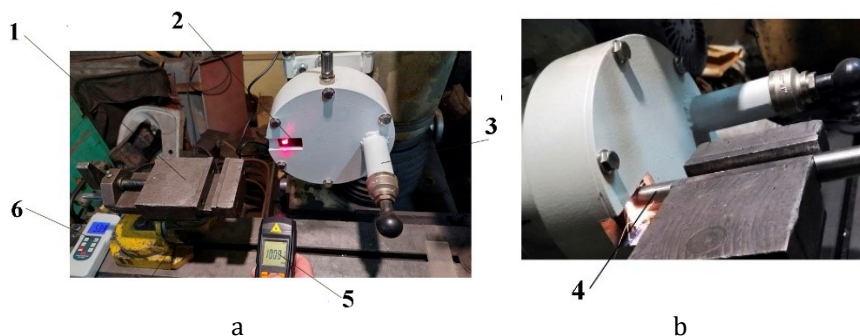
Experimental procedure: (a) experimental setup; (b) grinding process; 1 – vise for clamping the workpiece; 2 – grinding wheel; 3 – lubricant supply device; 4 – workpiece; 5 – grinding wheel rotational speed measurement unit; 6 – system vibration control unit.
